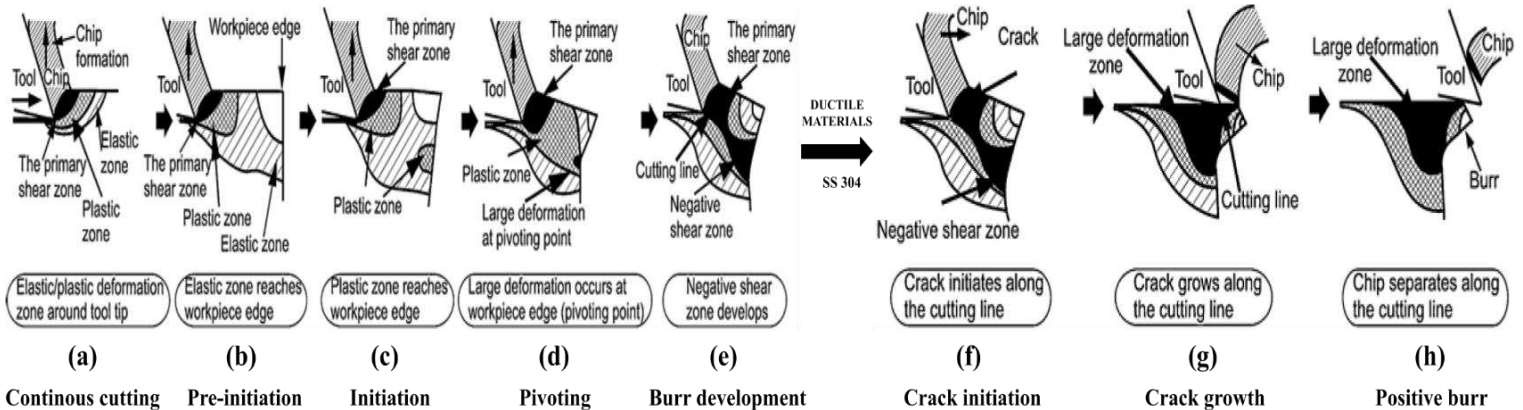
Schematic burr formation [57]. (a) Continuous cutting, (b) pre-initiation, (c) initiation, (d) pivoting, (e) burr development, (f) crack initiation, (g) crack growth, (h) positive burr.
